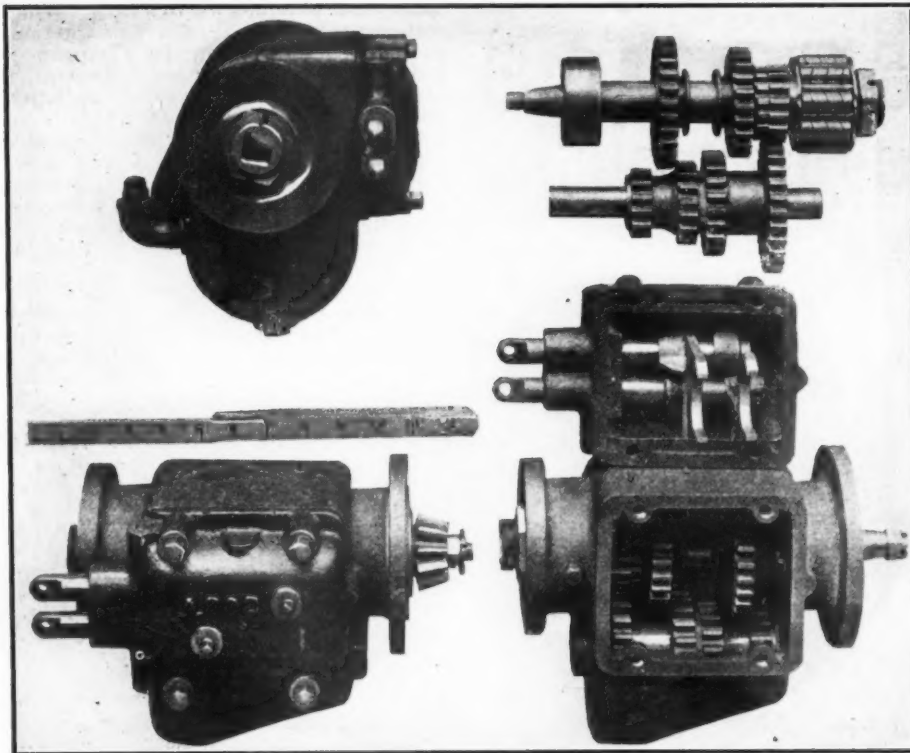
Northern small car gearset. This model is for attachment to the rear axle. Another type is made for unit power plant constructions
